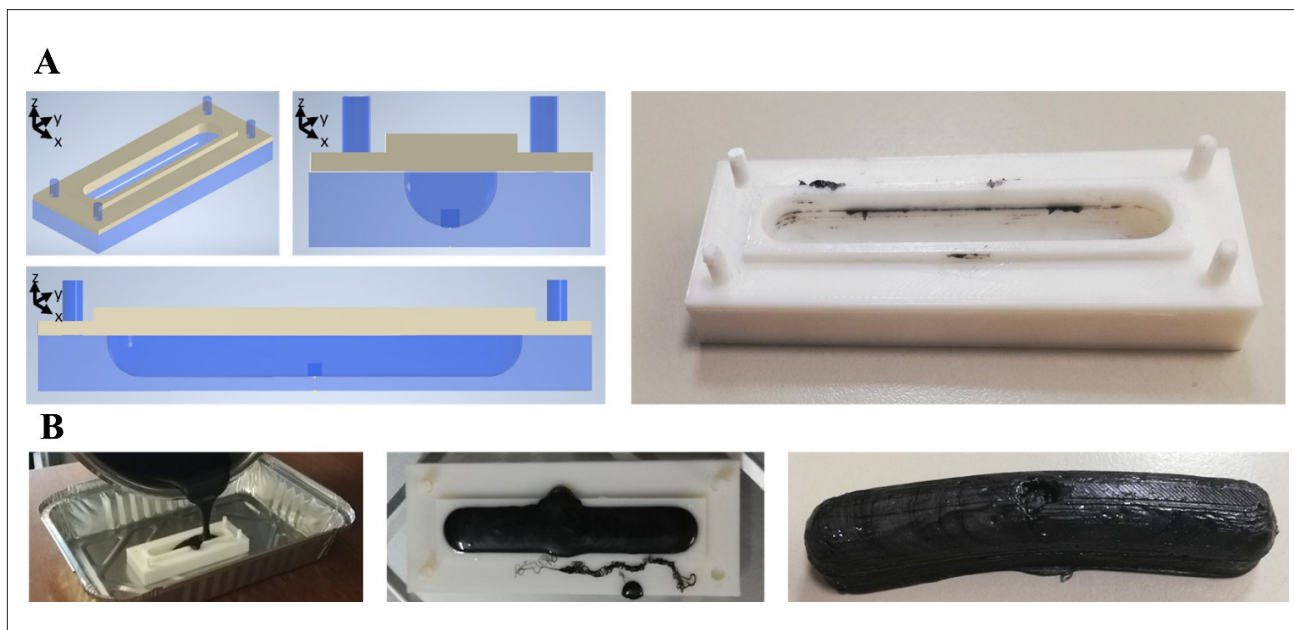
Phantom fabrication. (A) Computer-aided design model of the mold. (B) 3D-printed mold. (C) The ballistic gelatin is poured into the mold. (D) The gel is left to dry. (E) Phantom results.
